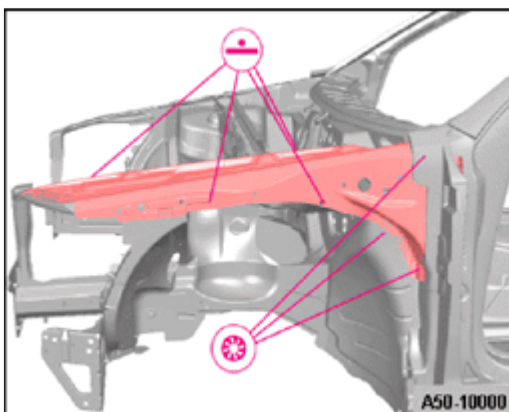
Gas-Shielded Arc Plug Weld Seam
